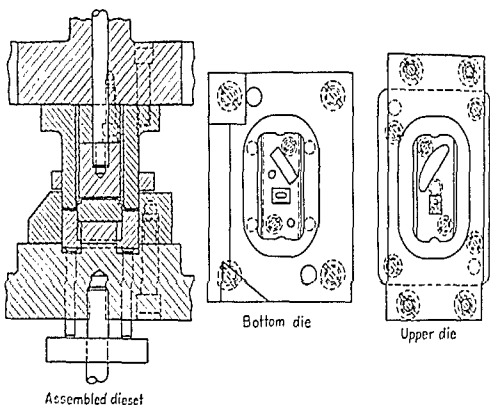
Combination blank, draw, form, and pierce die for making spice-box cover. Die components are arranged in sections for adjustment after sharpening.⁴
